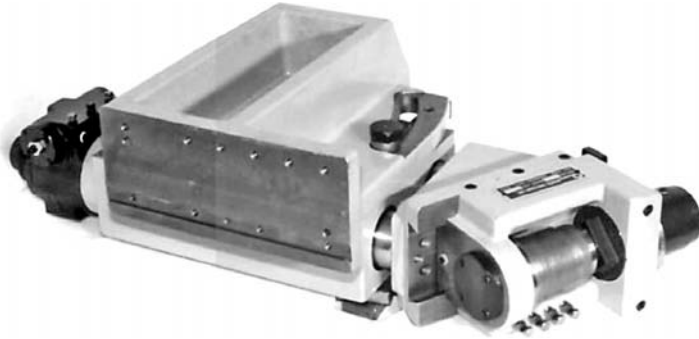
shows an example of a hydraulic-mechanical compensator infeed system with a mounting casting attached directly to the existing platform of a single-point traverse diamond on a Cincinnati centerless grinder.
